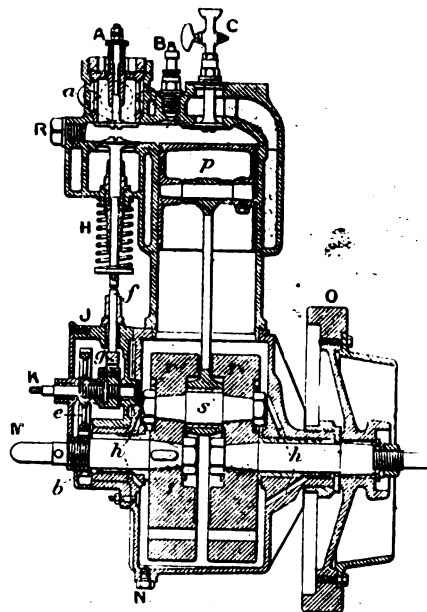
Section of 6½-h.p. Peugeot Motor.
